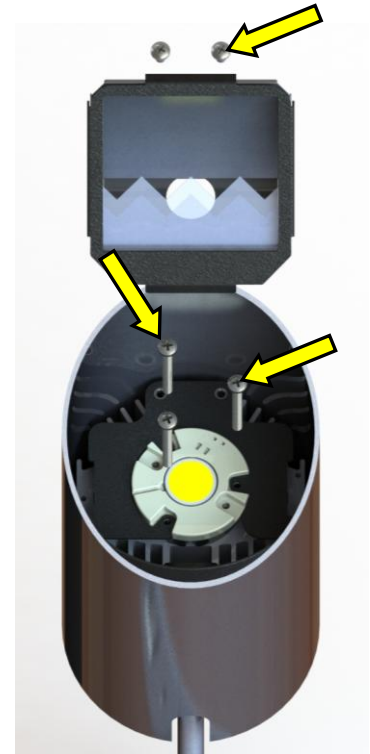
Remove the reflector assembly by removing the two assembly screws, and then remove the 3 screws holding the LED.
